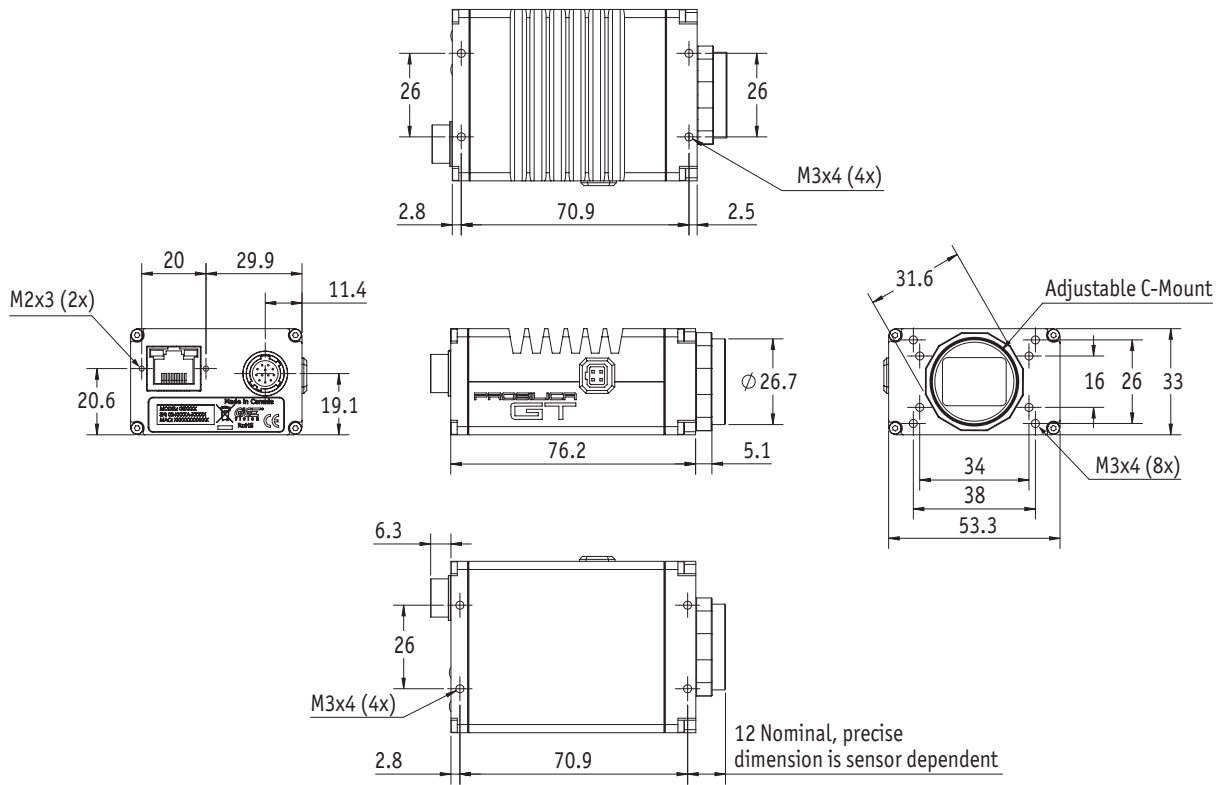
Mechanical dimensions for C-Mount Prosilica GT extended cameras
